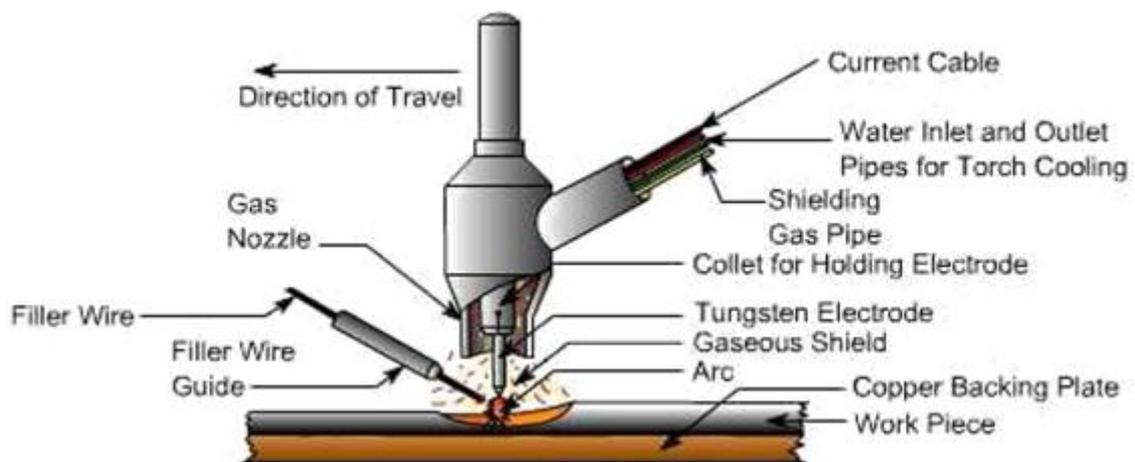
Principle of TIG Welding. [Ref:1]
